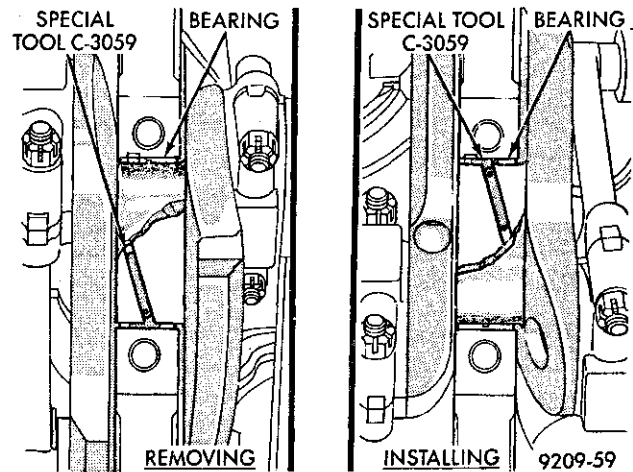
Upper Main Bearing Removal and Installation with Tool C-3059
